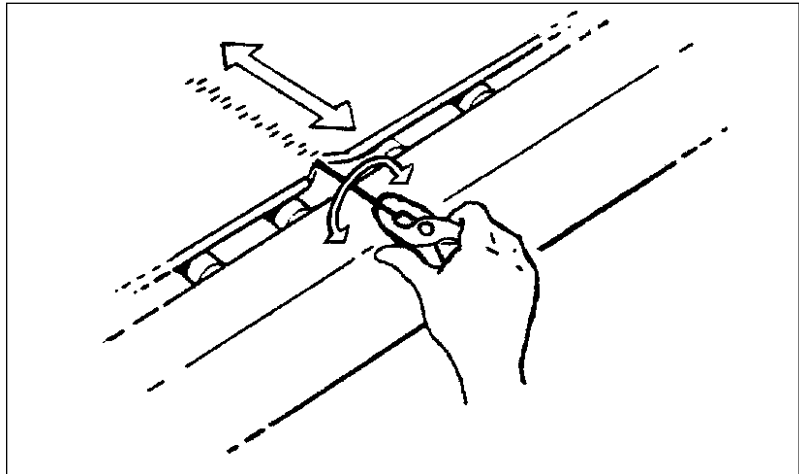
REMOVING/INSTALLING STEEL PIN
